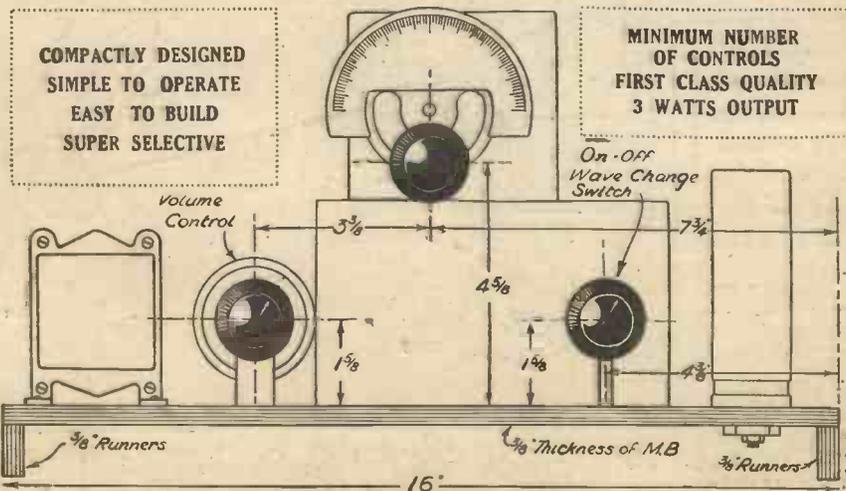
This drawing will enable you to mark off the holes in the panel of the cabinet.
